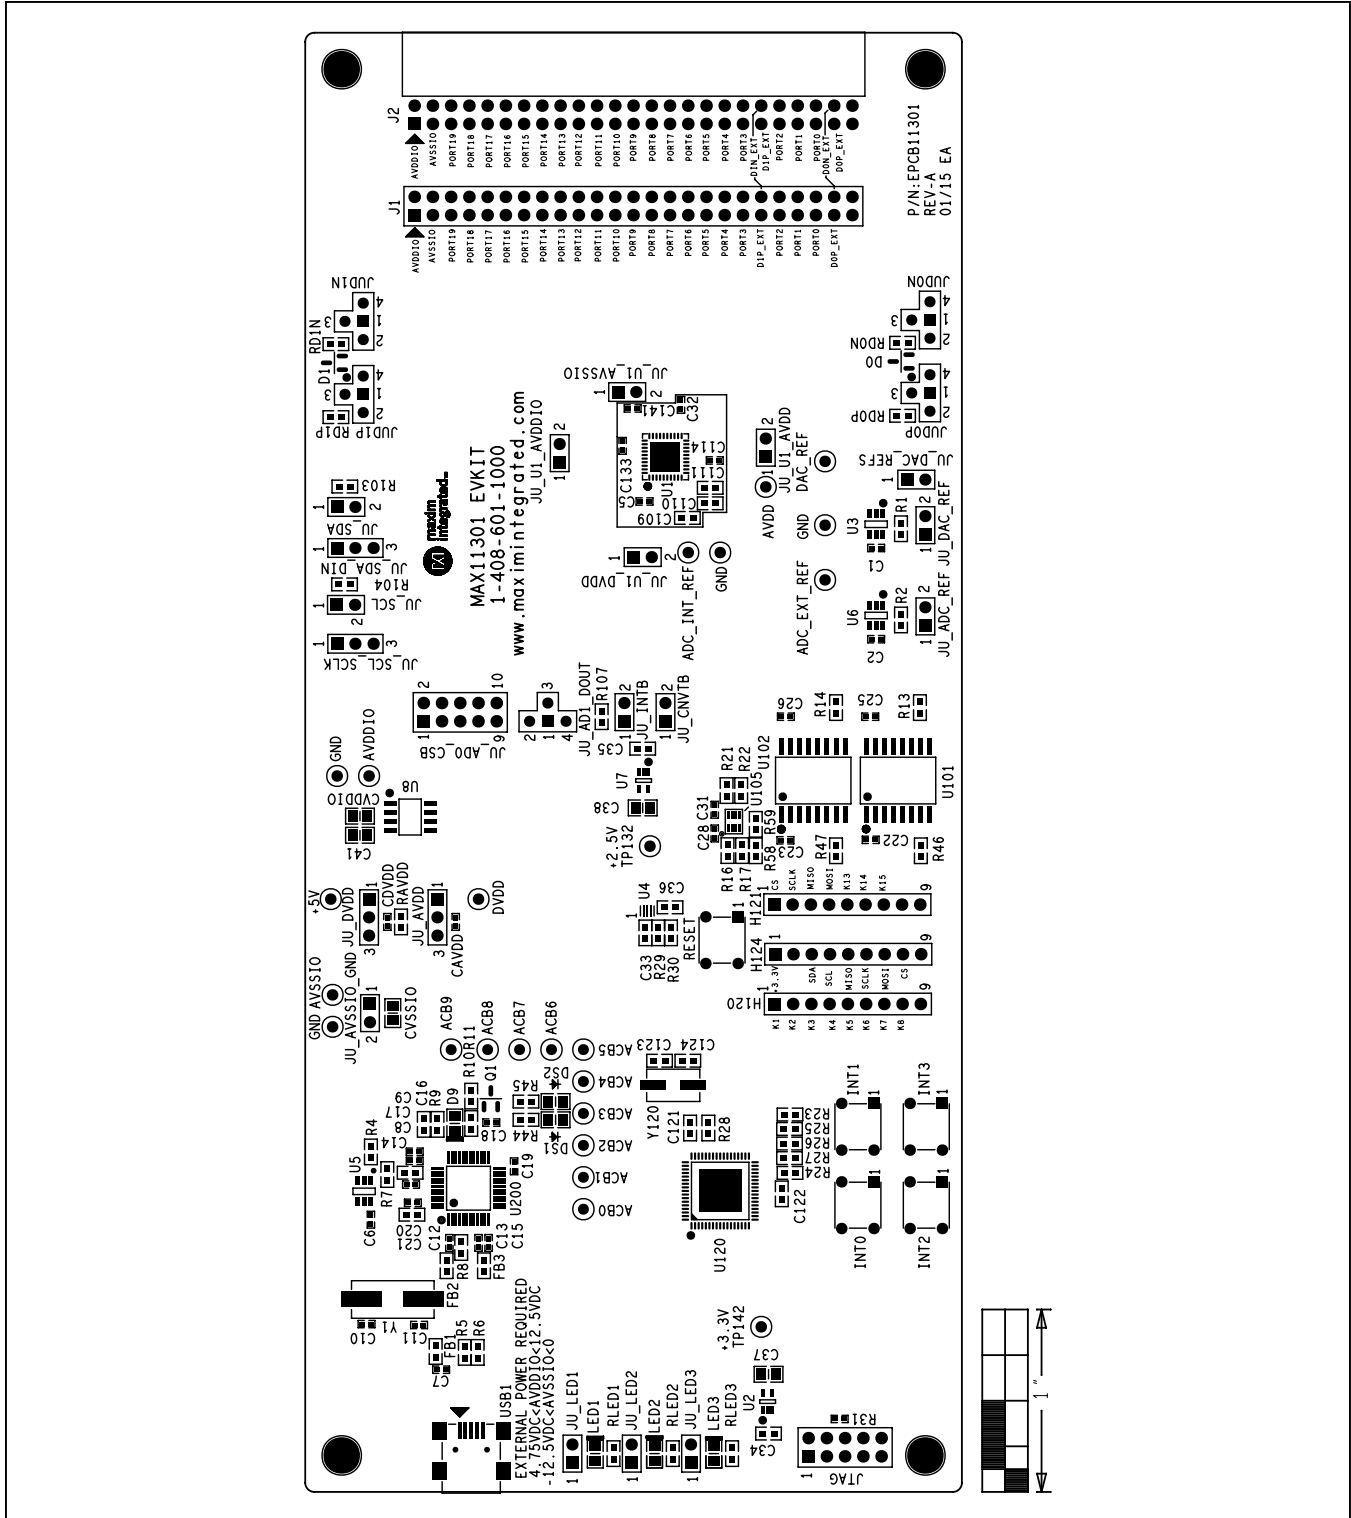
MAX11301 EV Kit Component Placement Guide—Component Side
